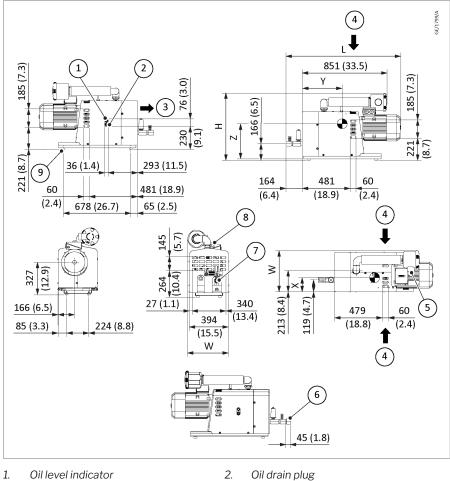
Dimension drawing - OP 065, OP 150 (Overpressure pumps)
